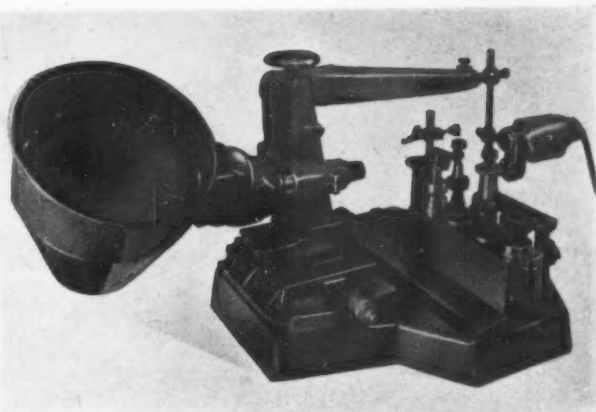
The "Precision Grinding" Projectorscope Optical Equipment is Here Shown Set Up for Checking End Mills for Nose Radius and Run Out
